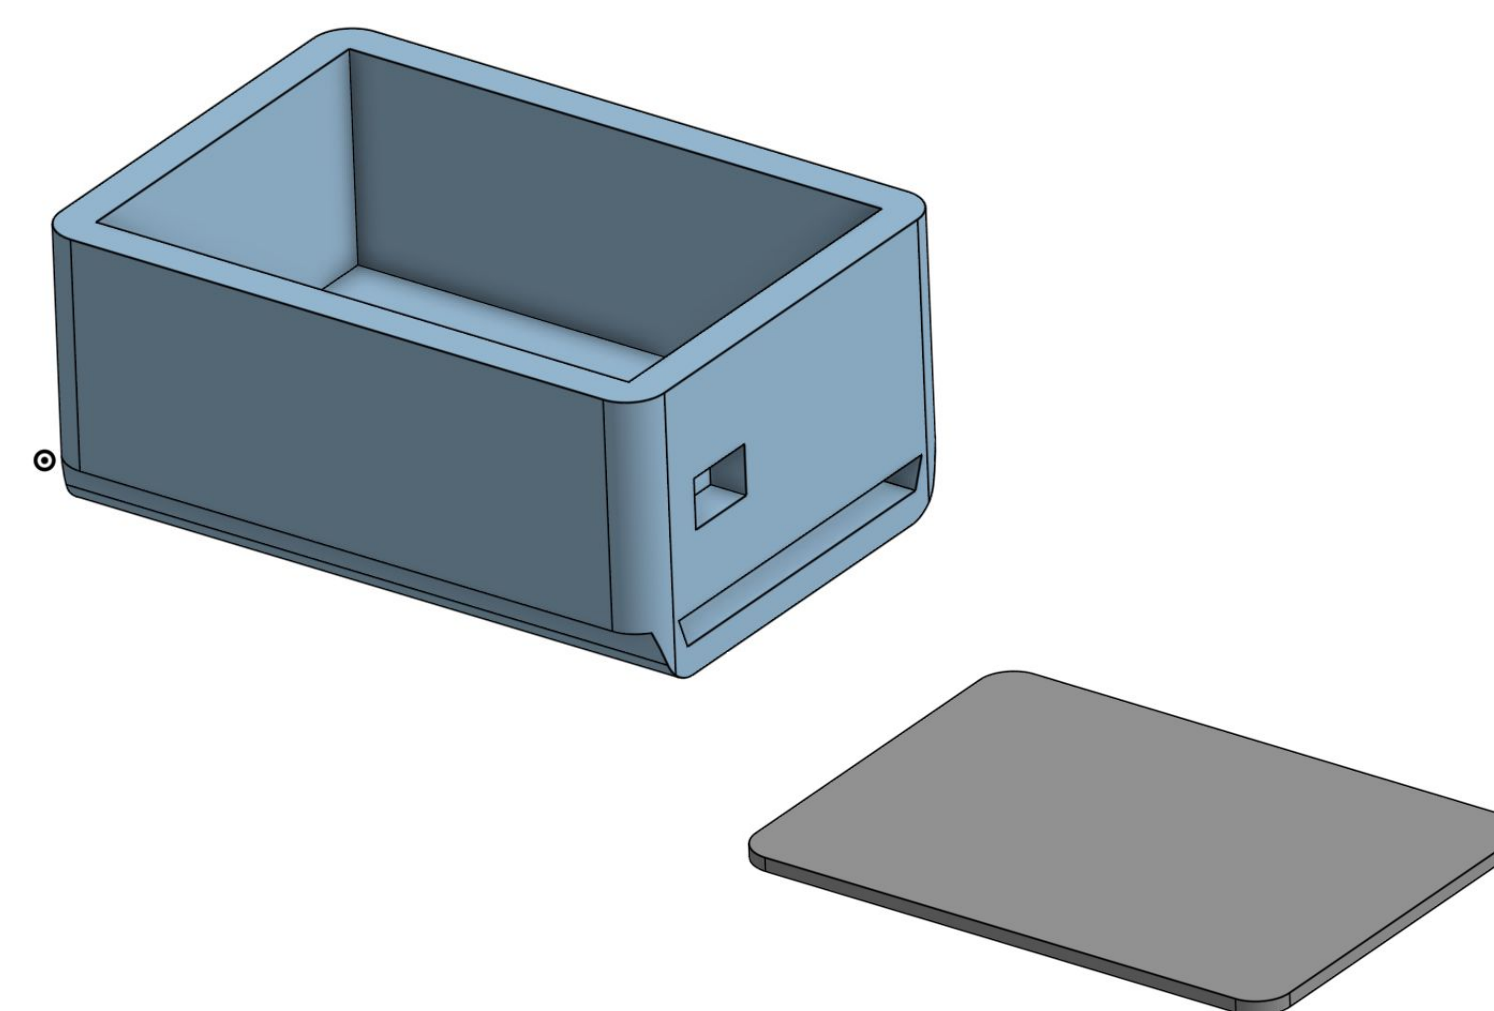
Solidworks assembly of 3D printed ankle band box with a lid
